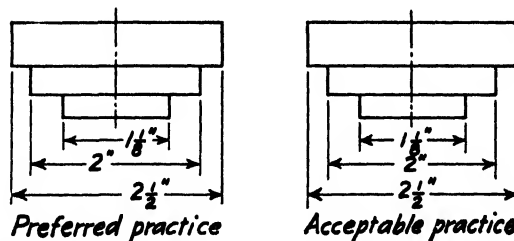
Stagger the figures in parallel dimensions where it will make them easier to read.
